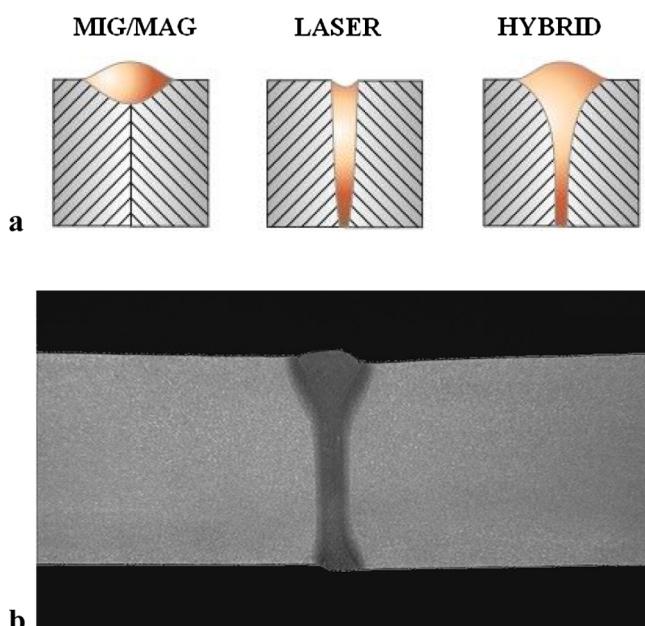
Patterns of formation of weld beads during arc welding, laser welding and hybrid laser arc welding, respectively, and (b) sectional view of a weld bead of a hybrid laser arc welded specimen.
